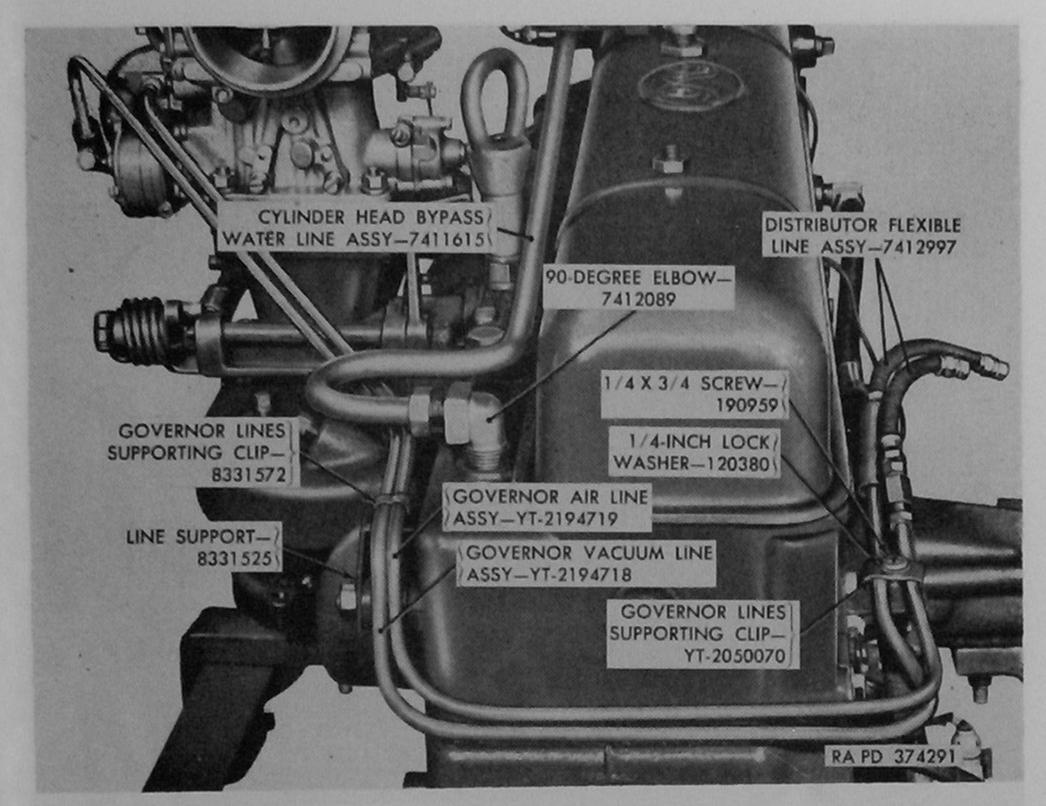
Location of governor line clips and cylinder head bypass water line—engine assembly 7411599.
